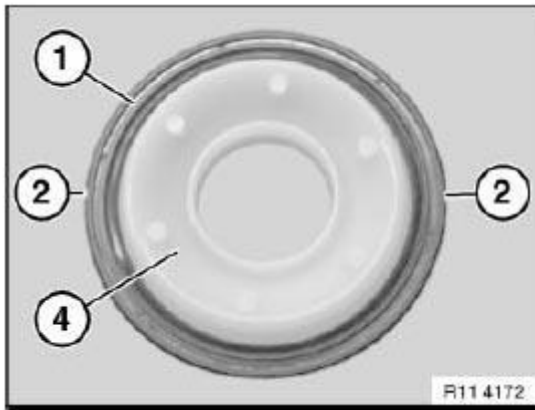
Identifying Radial Shaft Seal, Groove And Sleeve
